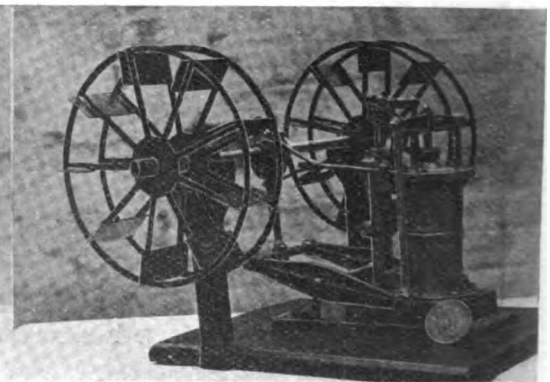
ECCENTRIC ROD, SHOWING METHOD OF ATTACHMENT TO ROCKER LINKS.
